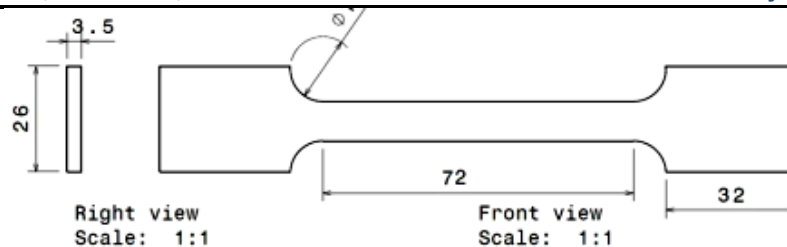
Tensile Test ASTM E8 Sample drawing with dimensions
